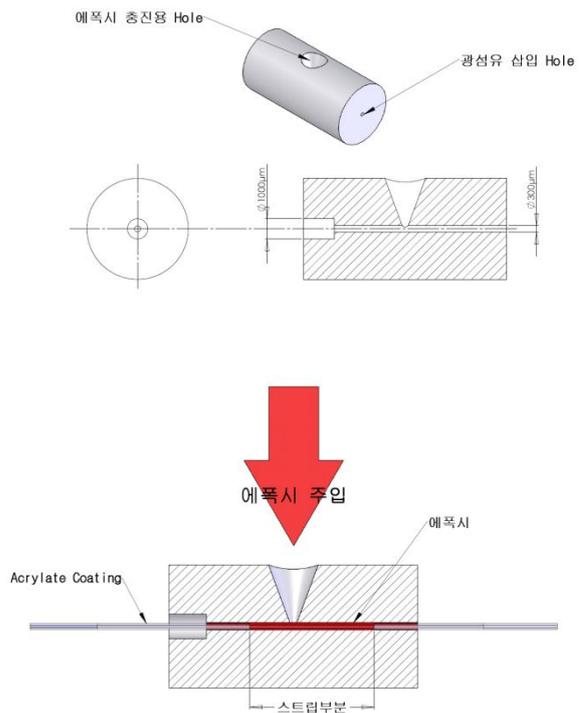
Protection tube for stripped fiber and fixing the tube with epoxy.
